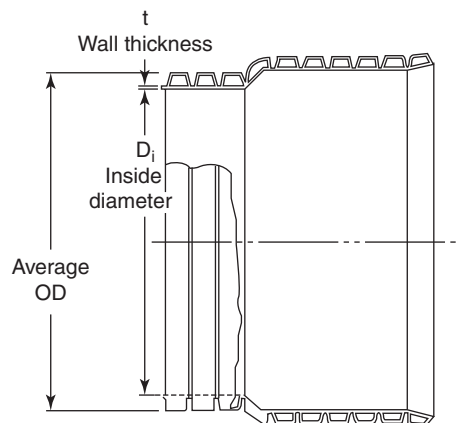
Dual wall corrugated profile wall PVC pipe
